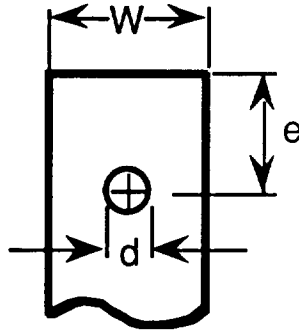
Illustration of Bolt Bearing Specimen Dimensions.
